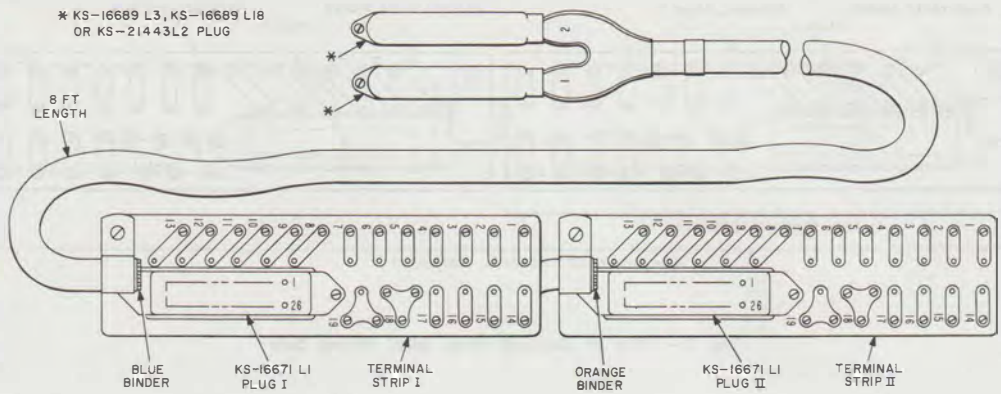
B50B Connector Cable—View of Terminal Strip, Local Wiring Side
